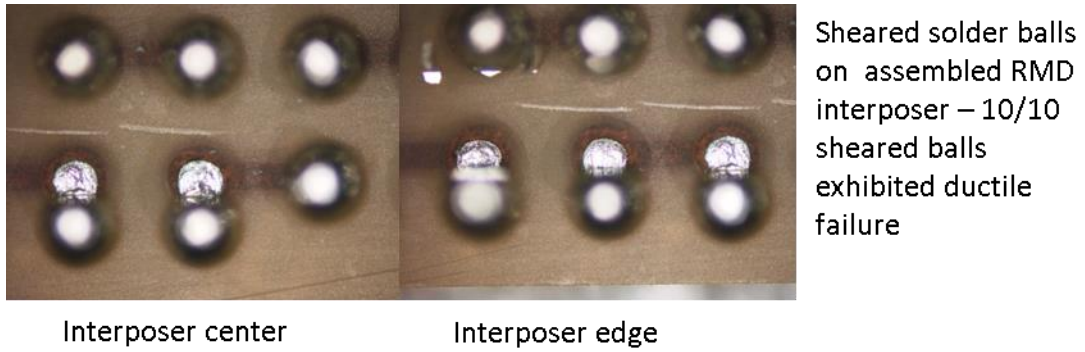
Shear testing on balled interposers resulted in ductile shears indicating good ball attachment
